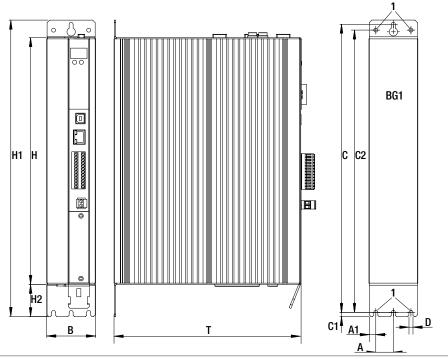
Dimensional drawing, housing with air cooling, schematic depiction for BG1
